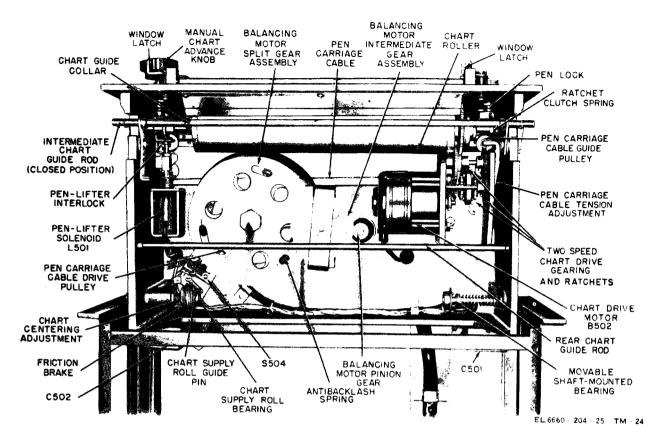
Frequency-time recorder RD-88A/TMQ-5, bottom view showing chart drive details.
